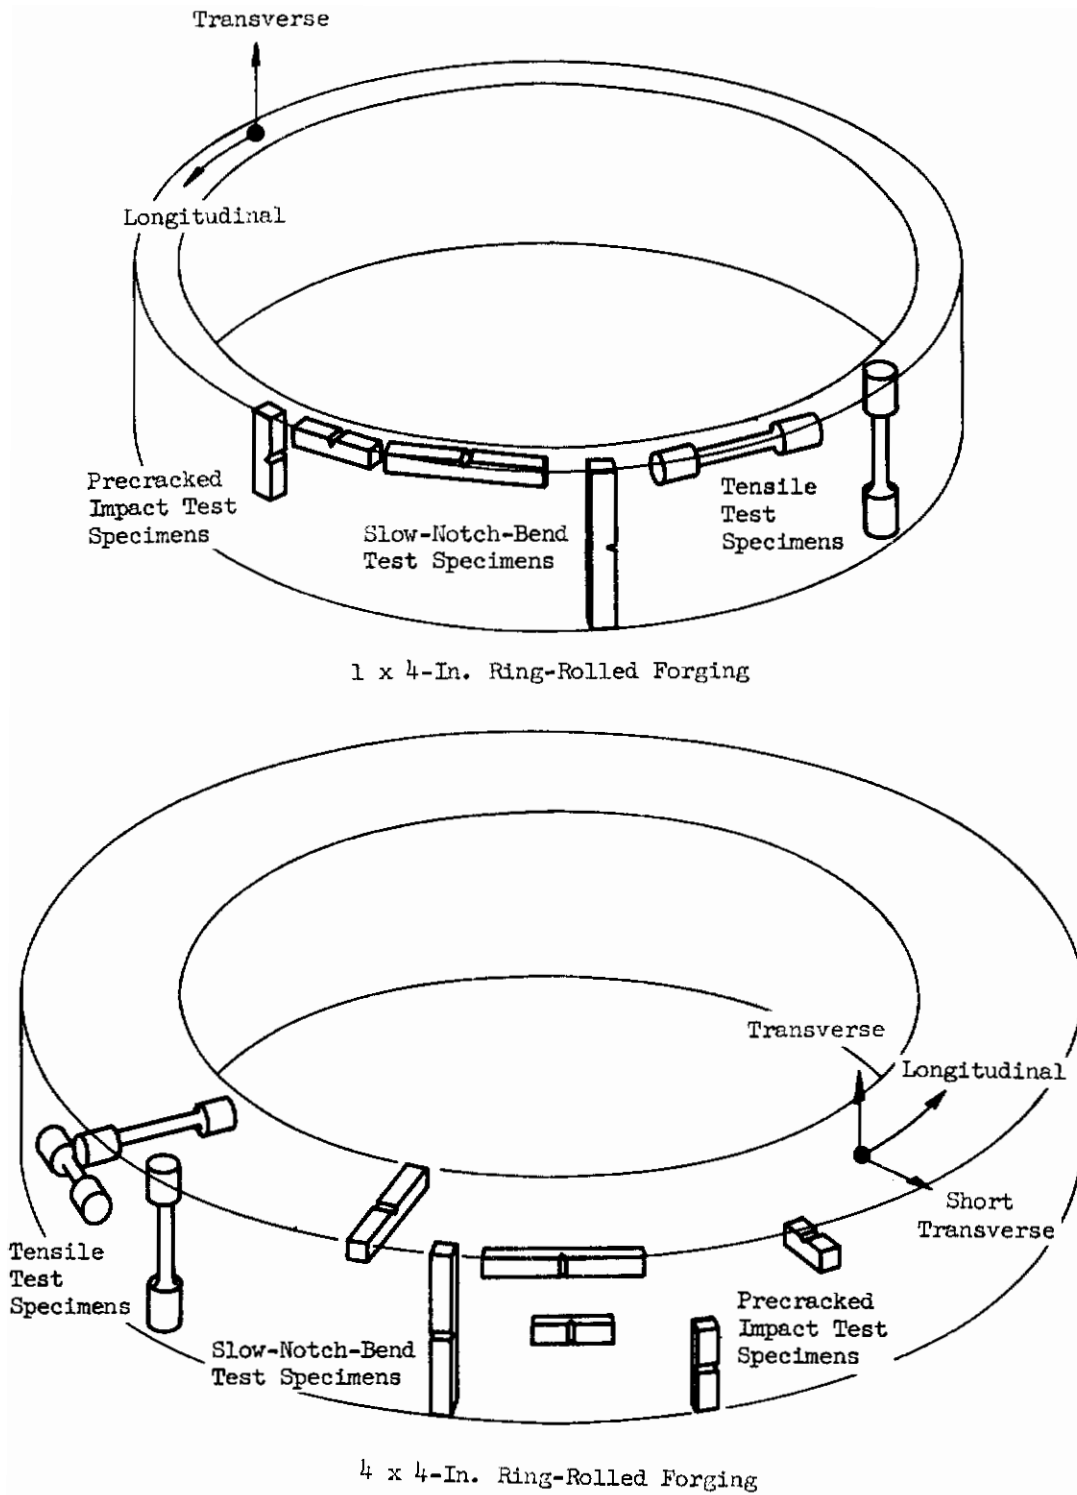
Location of Test Specimens in 18% Nickel Maraging Steel Forgings, Heat 24158
